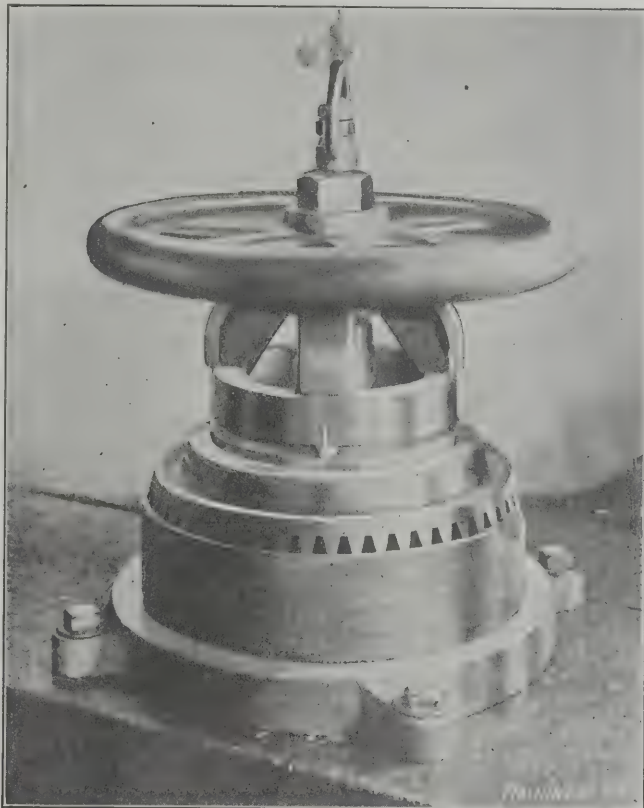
A Convenient Fixture for Assembling the Gears on the Gear Case
